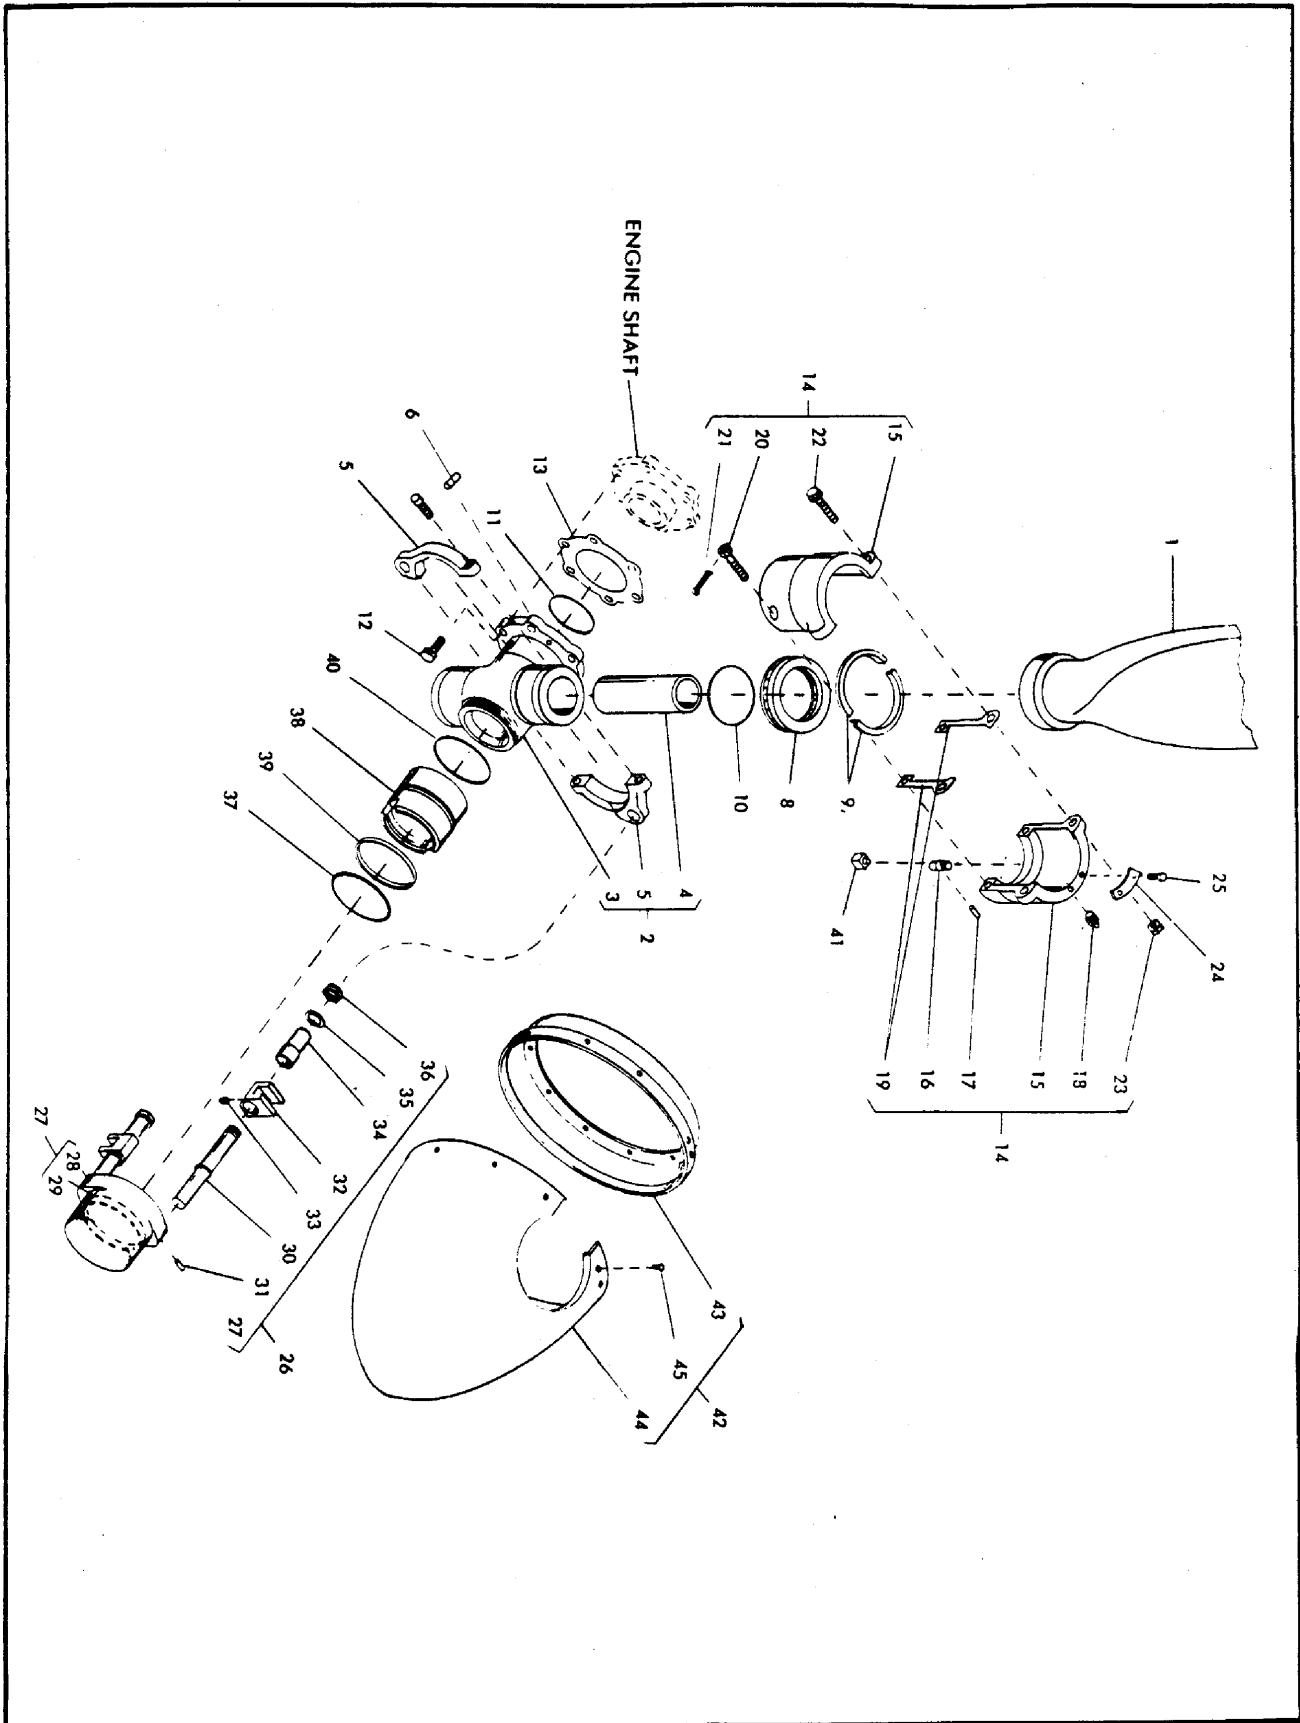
Models HC-92ZK-8D, 8L Propellers - Exploded View
